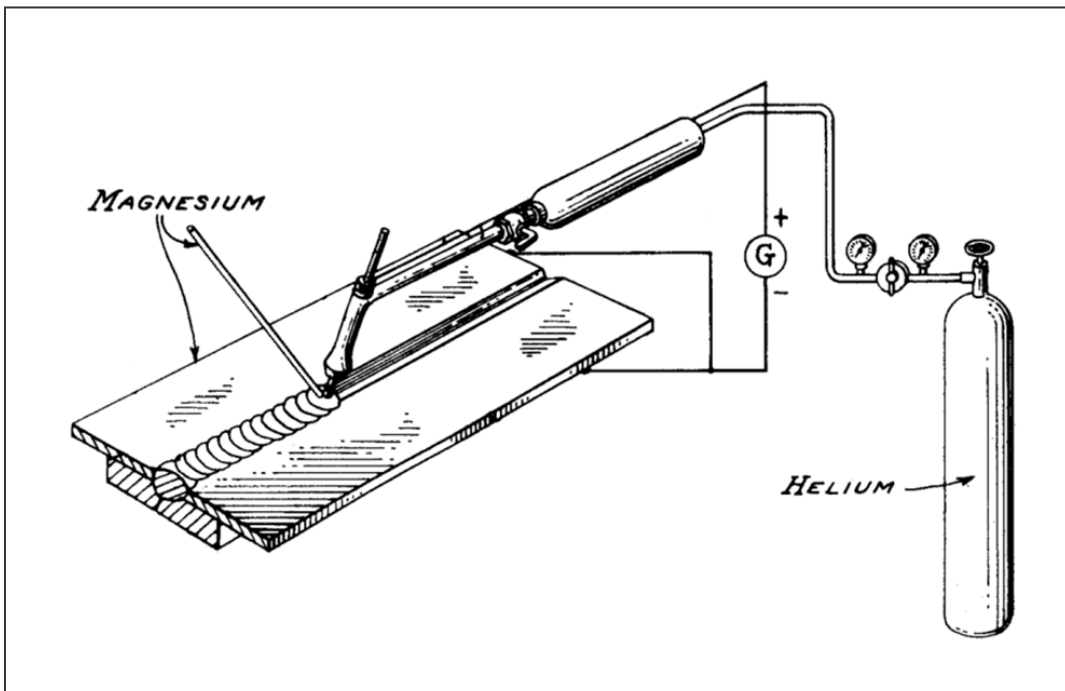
Original scheme of the welding torch proposed by Russell, Meredith. "Welding torch." U.S. Patent No. 2,274,631. 24 Feb. 1942.
